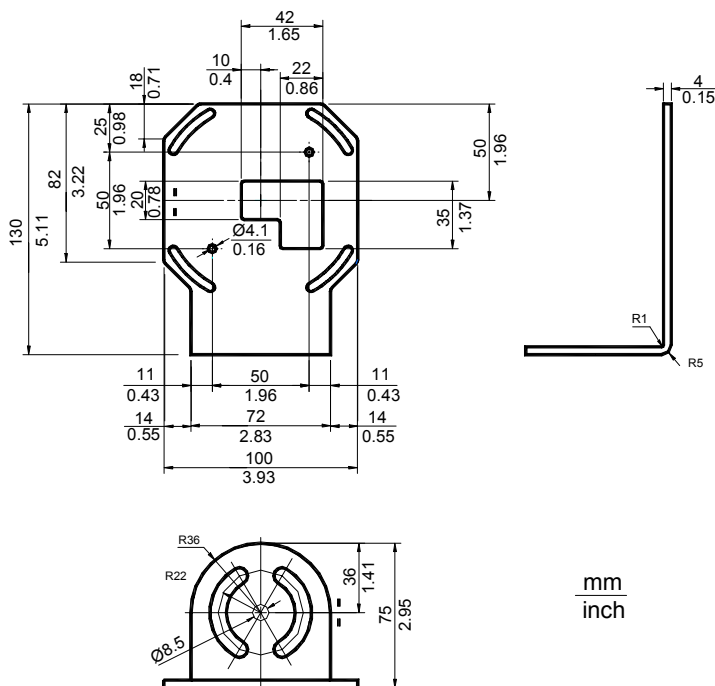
ST-210 Mounting Bracket Overall Dimensions
